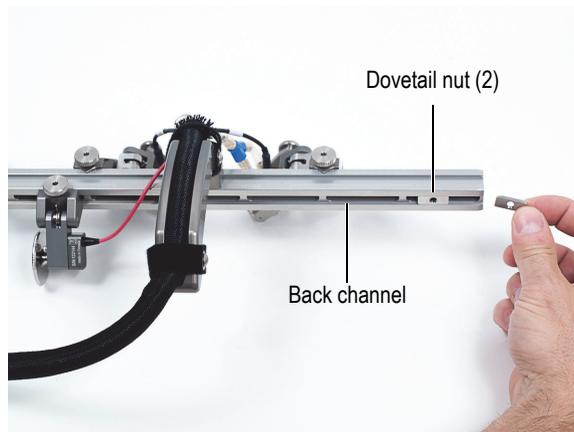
Inserting dovetail nuts in the frame bar back channel
